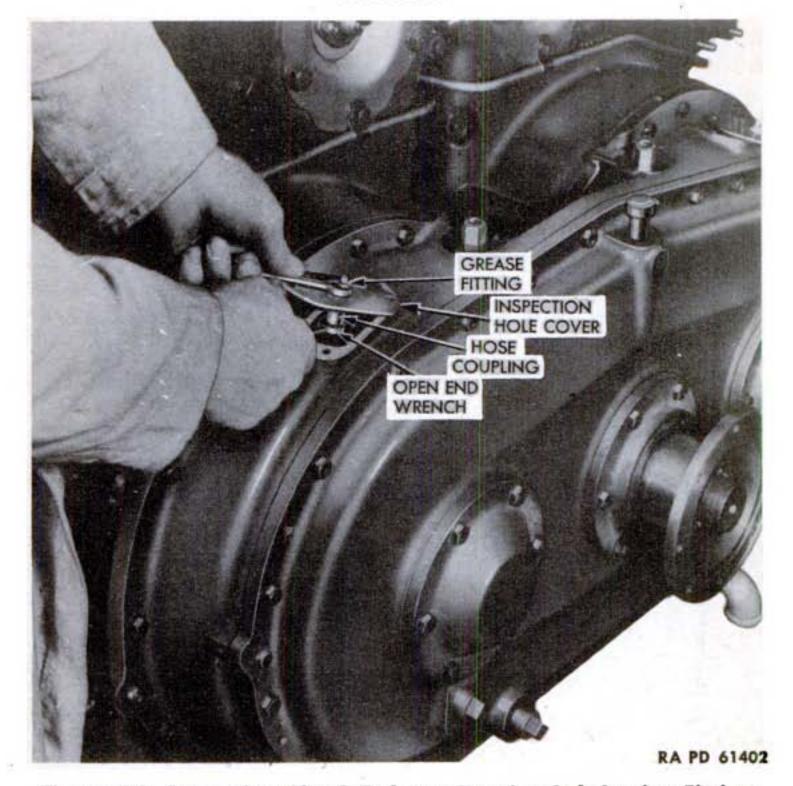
Removing Clutch Release Bearing Lubrication Fitting
